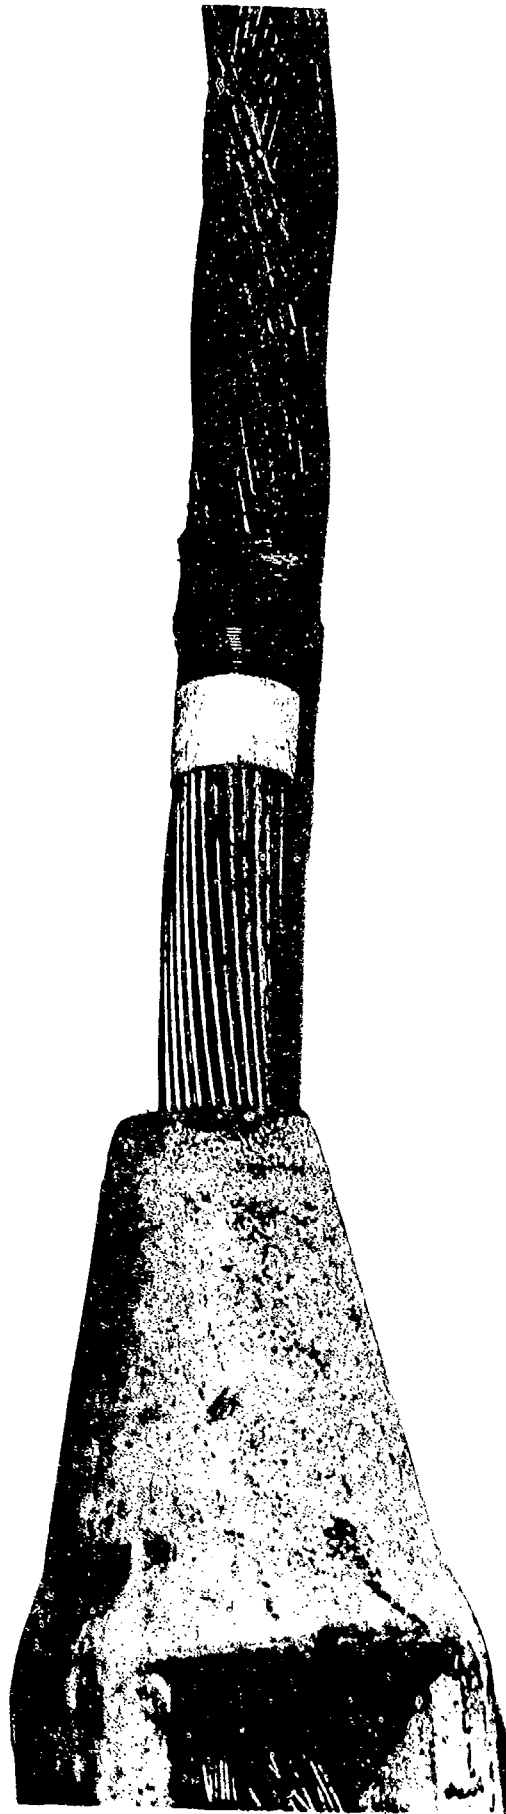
Eutectic Socket of SCA-10 Cable Showing Pull-Out of Cable During Tensile Test (Pressure Conditioned)
